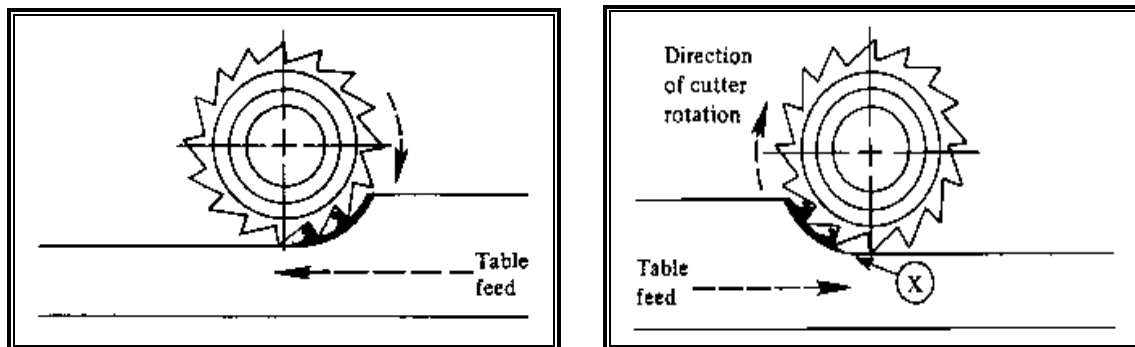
Schematics of down milling and up milling, respectively, depicting the milling orientation and table feed direction, which depict that down milling starts the cut with a high tooth load (Fundamentals of Machining and Machine Tools 2005).
